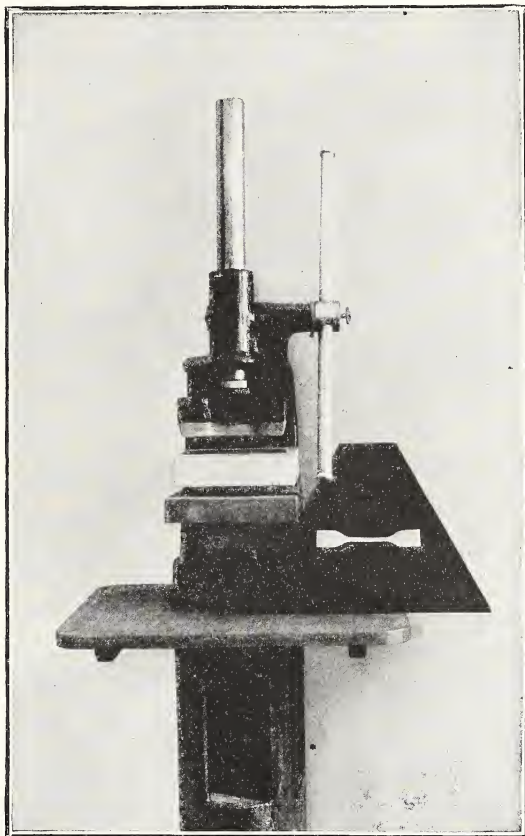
Arbor press and die for cutting rubber test pieces for determining the tensile properties
